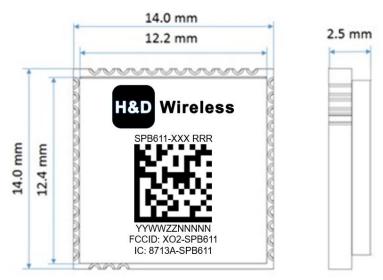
, Mechanical drawing, equivalent to a 41L QFN package. N.B. Drawing not to scale.
